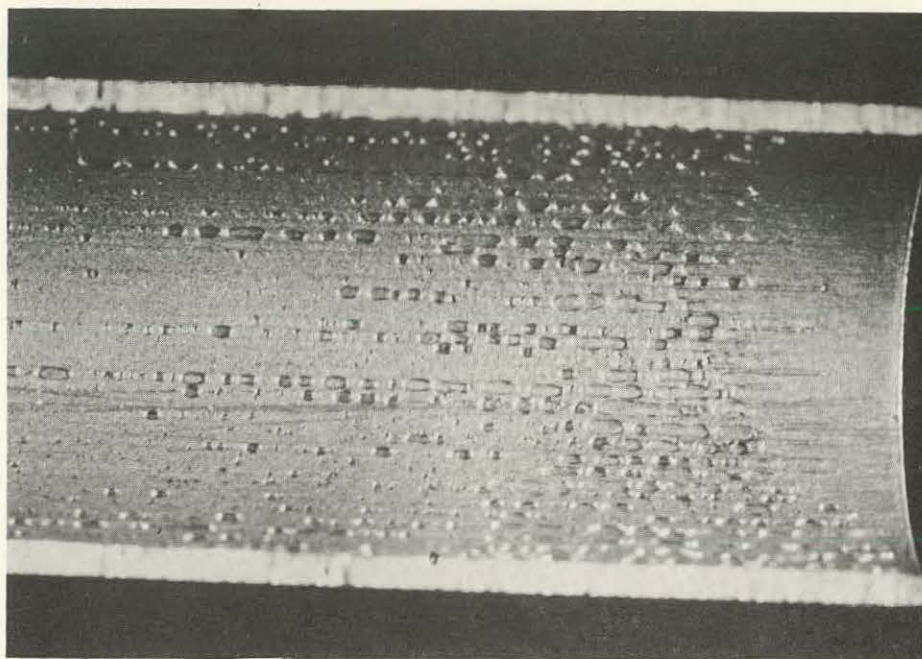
I.D. surface of 3003 Alclad M.A.N. brush
